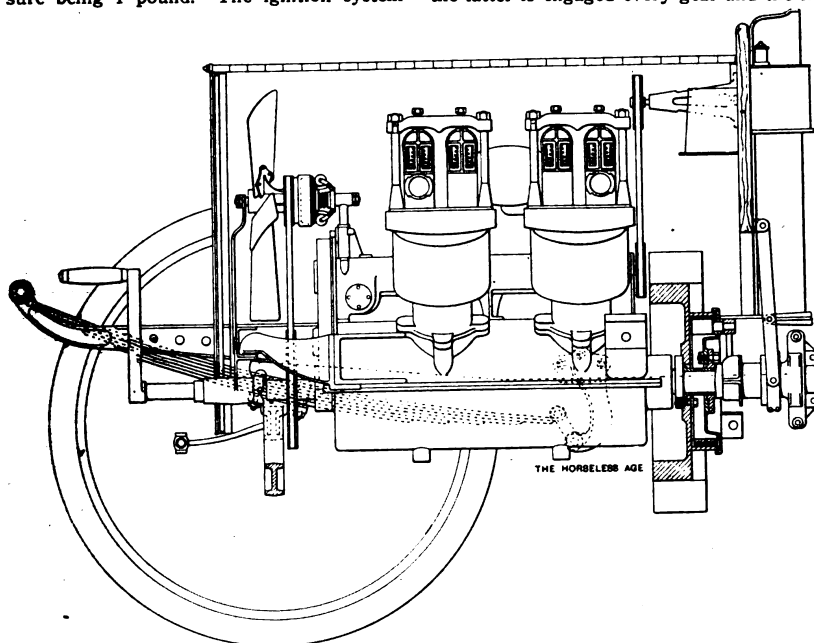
FOUR CYLINDER MOTOR, CLUTCH AND INCLINED SPRING.
